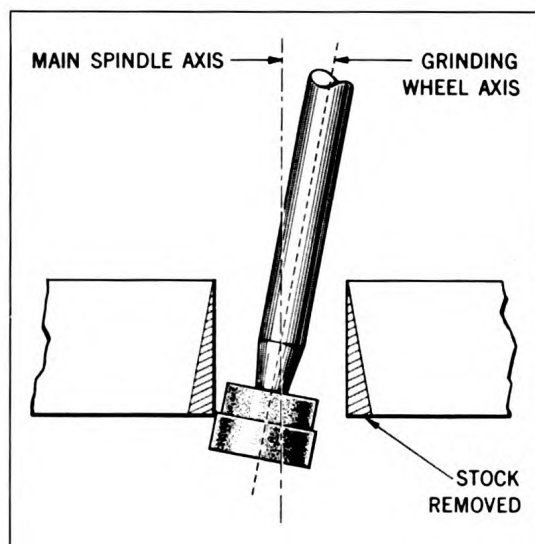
Greatest stock removal in tapering a straight hole occurs at bottom.
